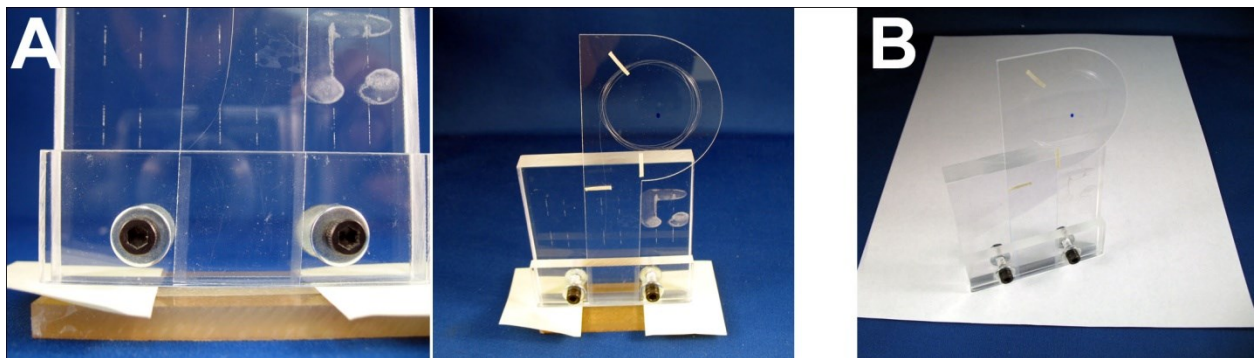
Alignment Jig for Fiber Truncation. (A) The fiber holder is clamped in the jig and spacers are used to advance the fiber end from the bottom surface of the jig. The jig assists in maintaining orthogonality of the fiber during lapping. (B) Copy paper was used to polish the fiber end prior to release.
